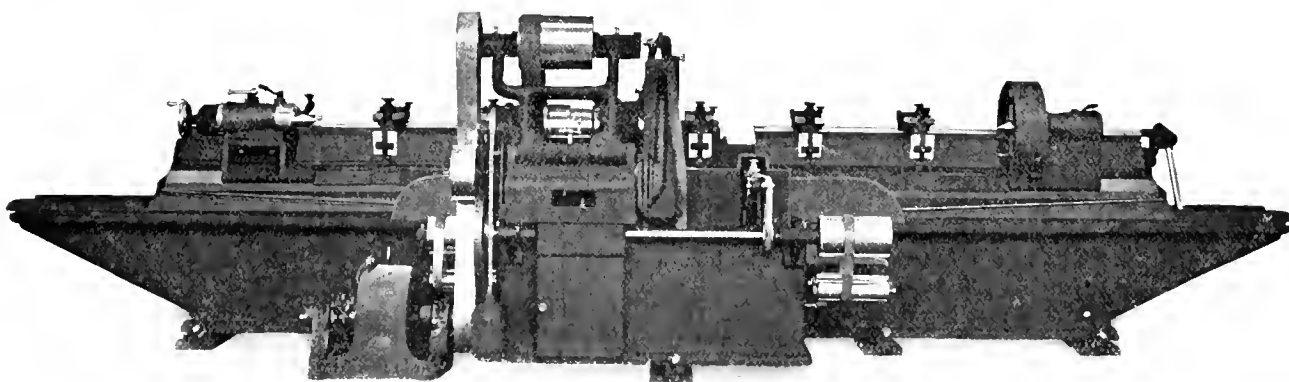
Rear View of Grinding Machine, showing Arrangement of Motor and Drive.
